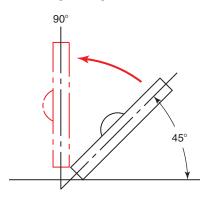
Change the plate angle as welding skill improves.
